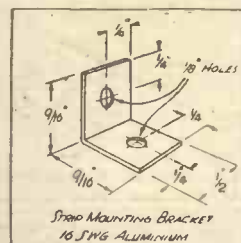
Two of these brackets are used to fix the terminal strip to the top of the "Easy-Cabinet."
